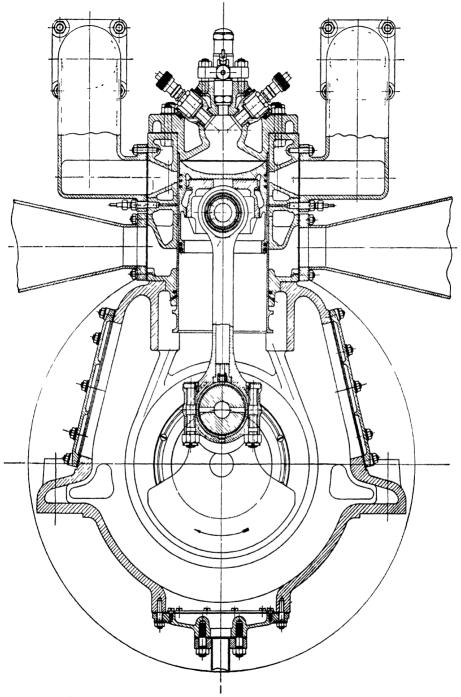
Cross-sectional arrangement of single-cylinder two-stroke high-power petrol engine, bore 4.81 in.  $\times$  stroke 5.5 in., type E65
